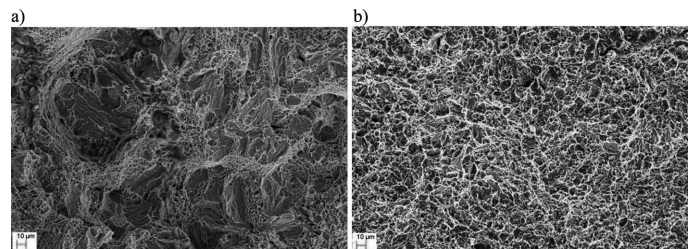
SEM micrographs of fracture surface after bending tests of the joints welded at the heat input of: a) 60 J/mm; b) 120 J/mm (magnification 2500x)
